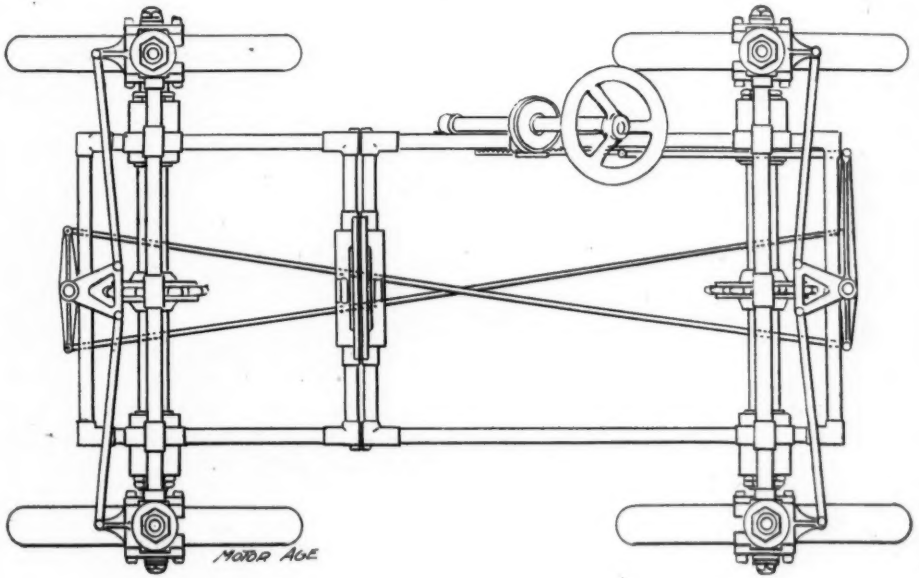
PLAN OF HALL'S STEERING MECHANISM.
